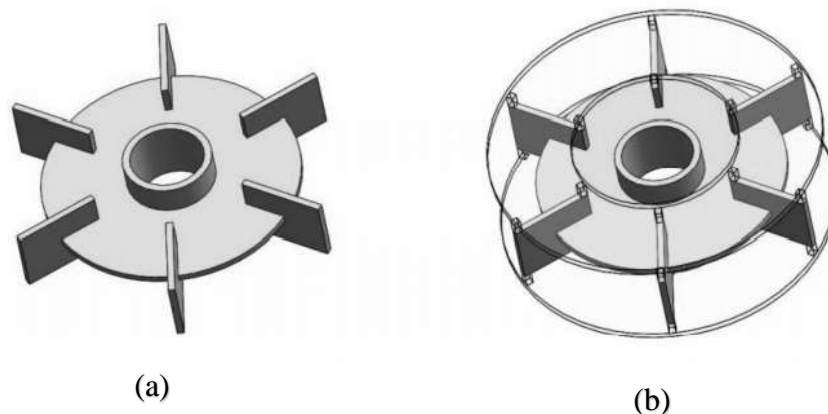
Rushton impeller (a) standard Rushton impeller (b) modified Rushton impeller(RT-C)
